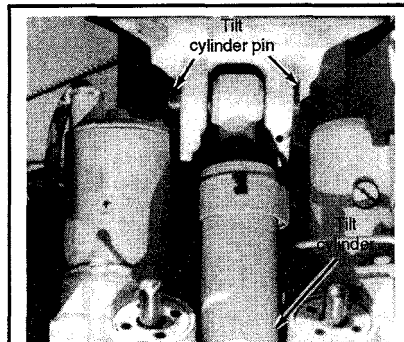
Push the tilt cylinder pin out of the bore to free the cylinder
